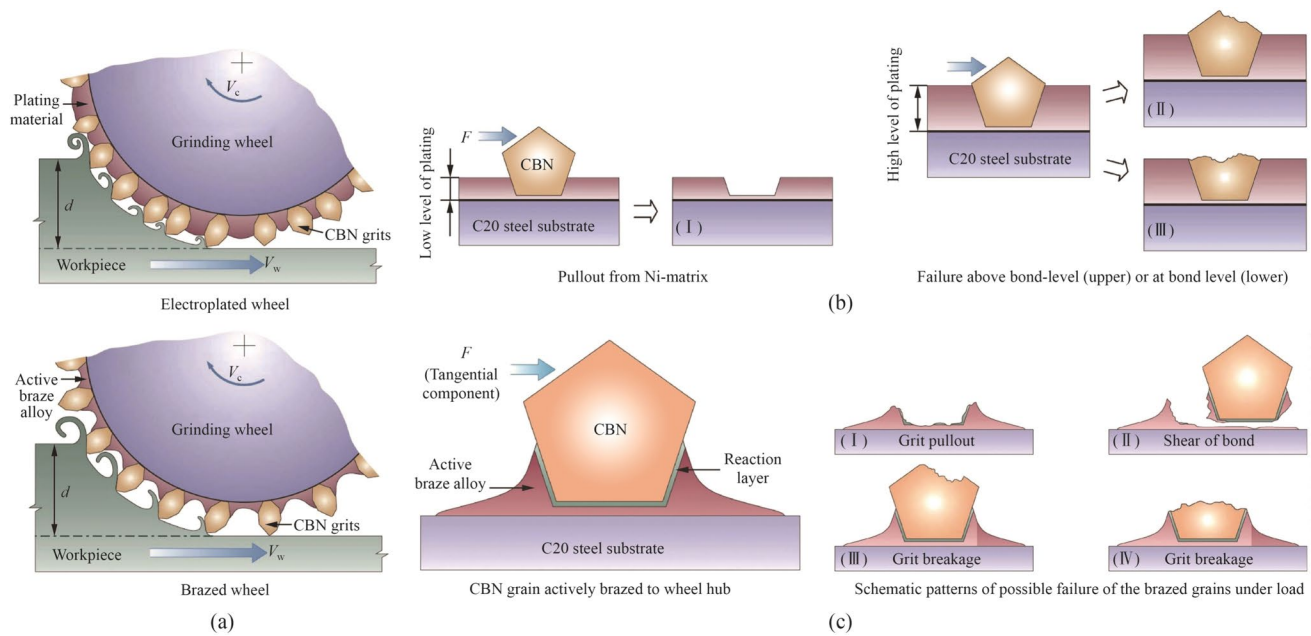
Possible abrasive failure modes of single-layer plated CBN grinding wheel and electroplated CBN grinding wheel a schematic diagram of single-layer plated and brazed CBN wheel, b possible
